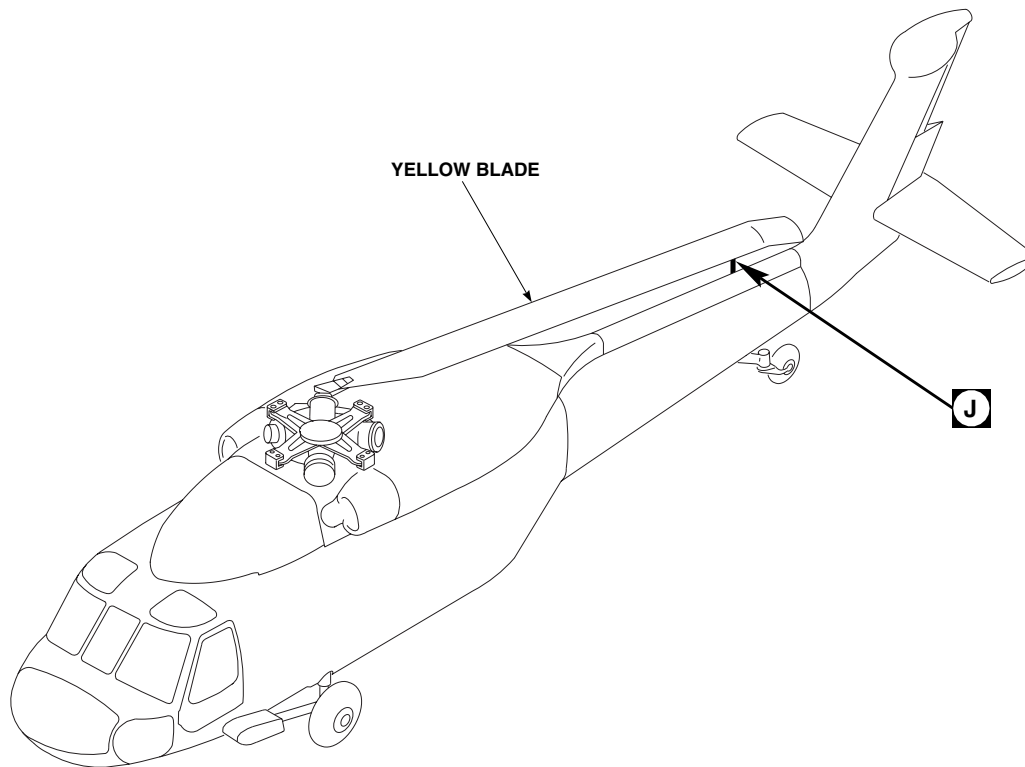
Fold/Spread Main Rotor Blades. (Sheet 5 of 9)
